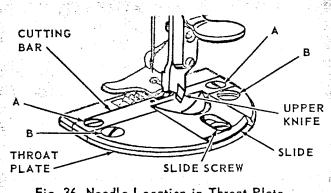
Needle Location in Throat Plate Cutting Bar (Machine 281-5)
